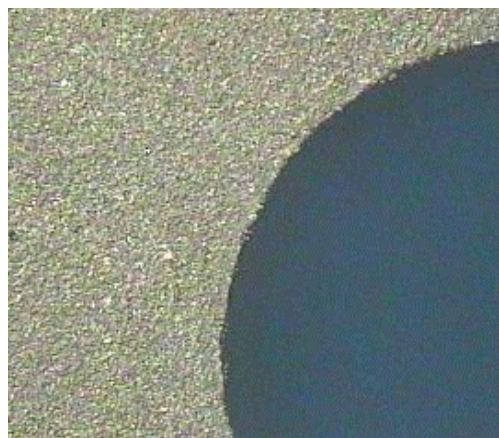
hole drilled in CBN by LMJ magnified 30 times (hole diameter: 2,6 mm; CBN thickness 3,25 mm)
